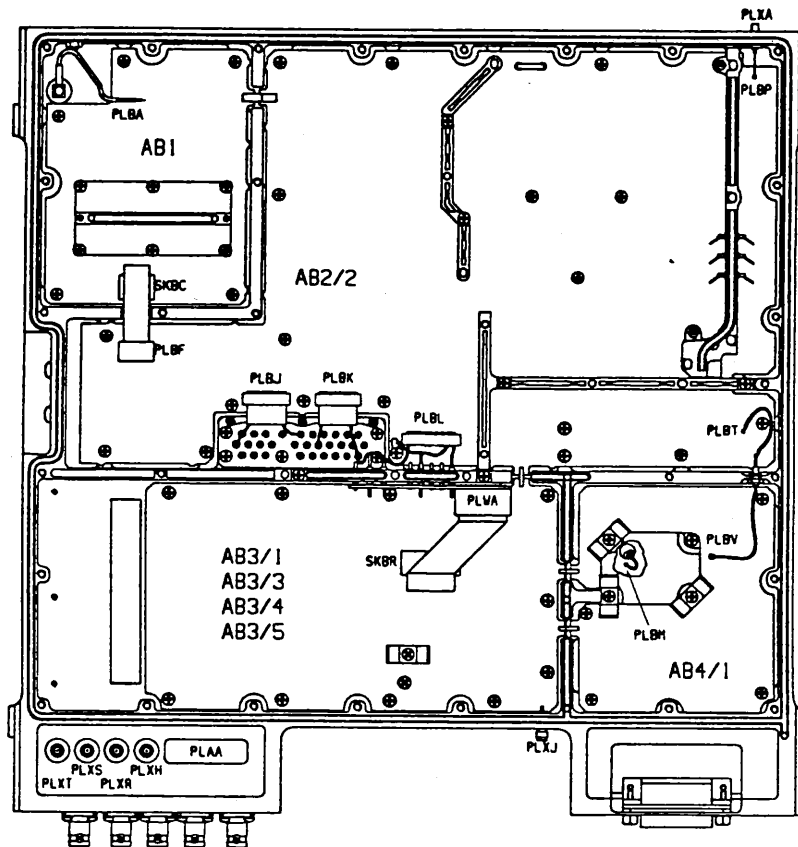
RF tray from below with tray cover removed showing locations of boards and connectors for pulse mod version
